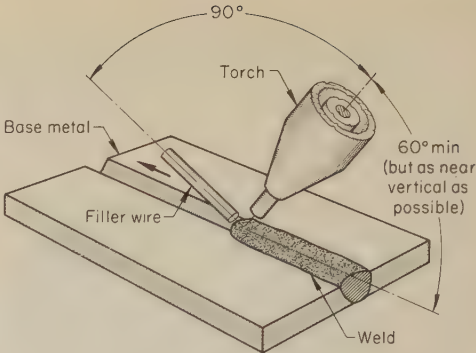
Angular relations among torch, filler wire, and joint, in gas tungsten-arc welding
